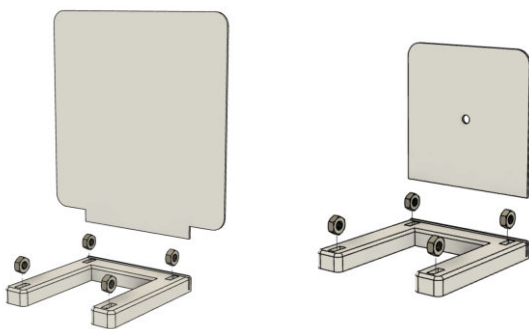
Exploded view of the screen (left) and the pinhole (right)
